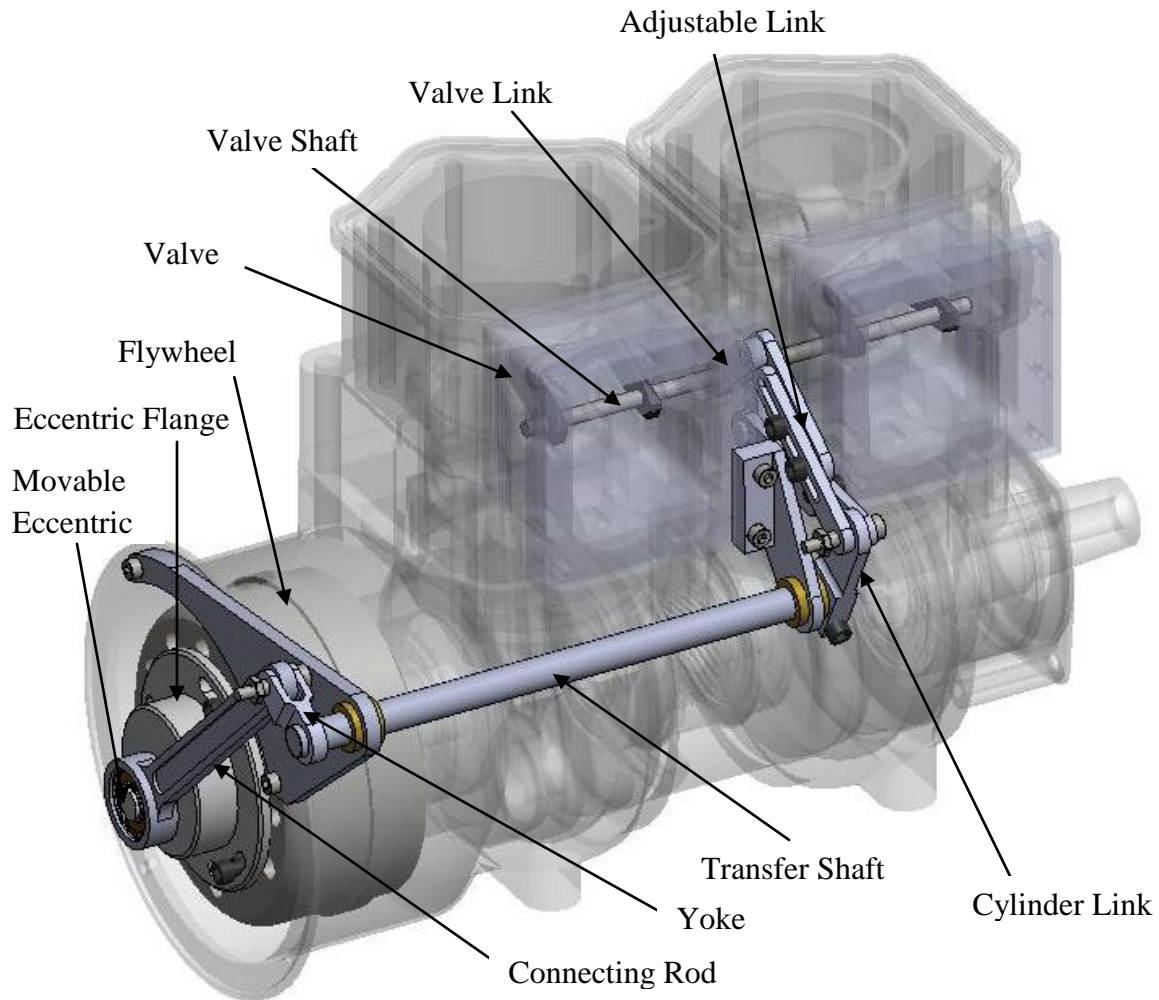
SCT Engine Linkage Model- Initial Design Showing Linkage
